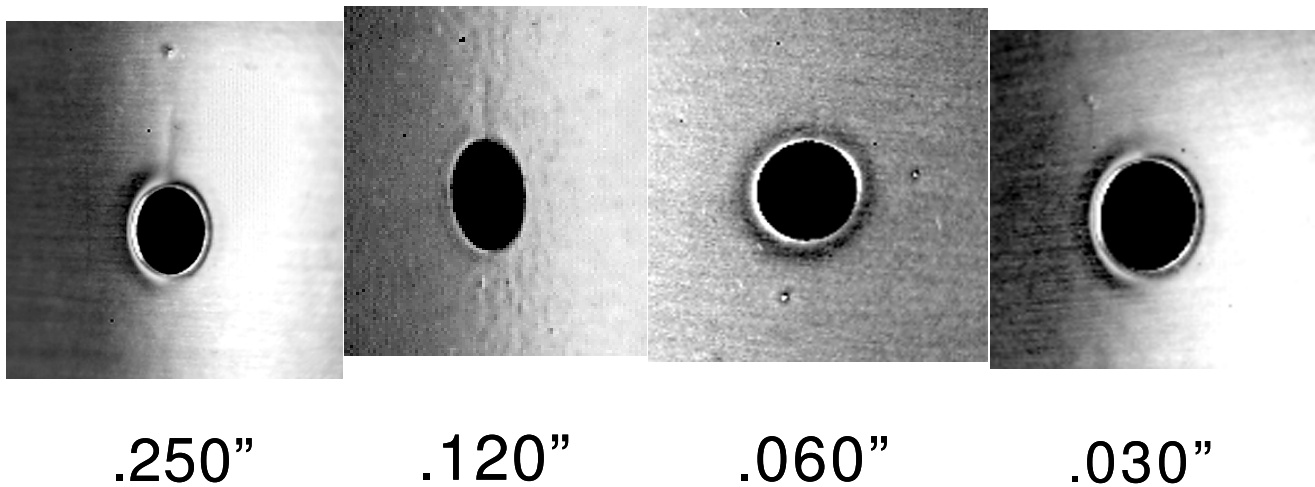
Successively smaller length fatigue cracks imaged under 3.5 mil primer and topcoat using a 25 mm IR lens.
